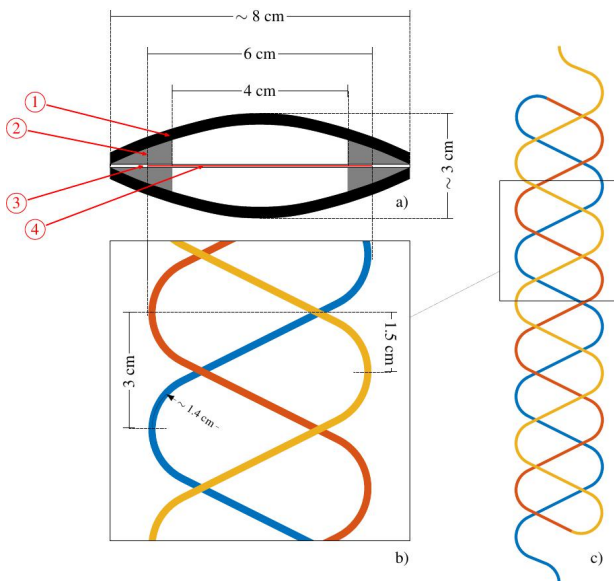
(a) The cable cross-section with dimensions and constitutive elements. (b) Magnified view of the fibres meandering path. (c) Meandering path of the embedded fibre.
